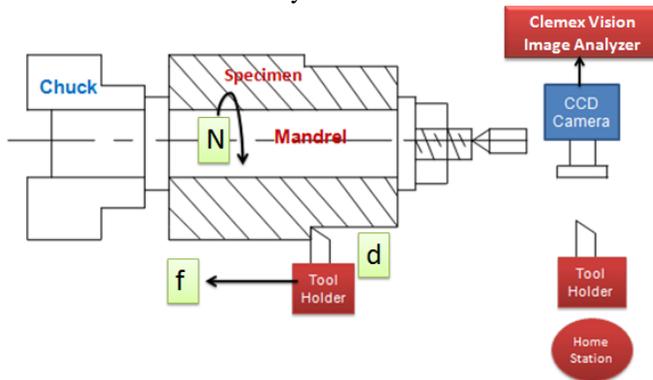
Experimental Set-up showing Tool Flank Wear Measurement
